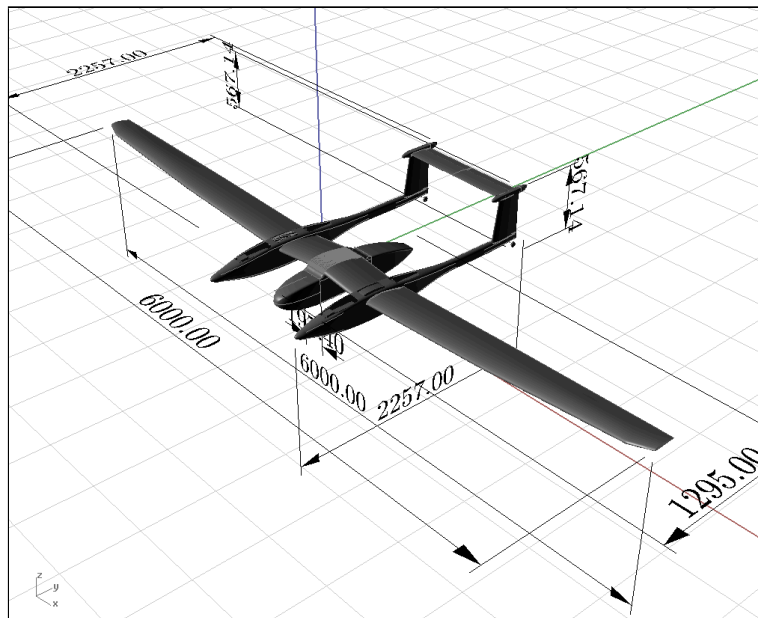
ISO view of the CSIR's Modular UAS (dimensions in millimeters).
